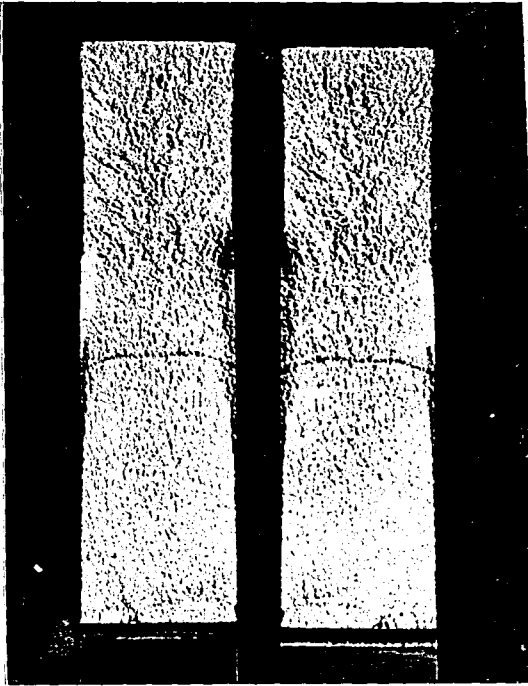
Fracture surfaces of specimen 6 ( $O/L=1.5$ )
